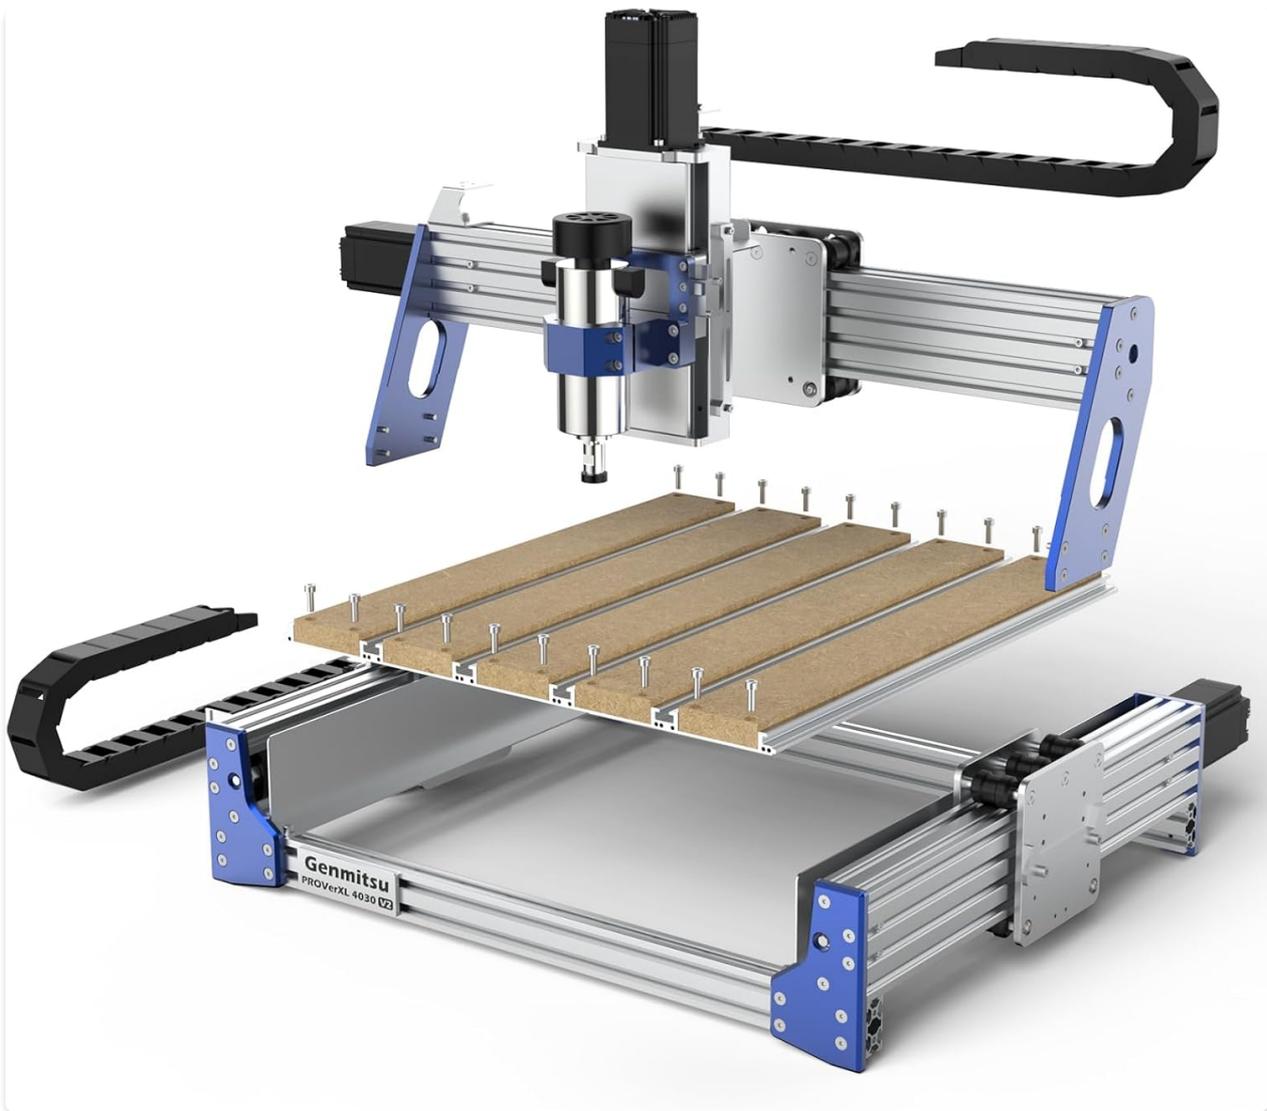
Exploded view of the PROVerXL 4030 V2 for assembly reference.
